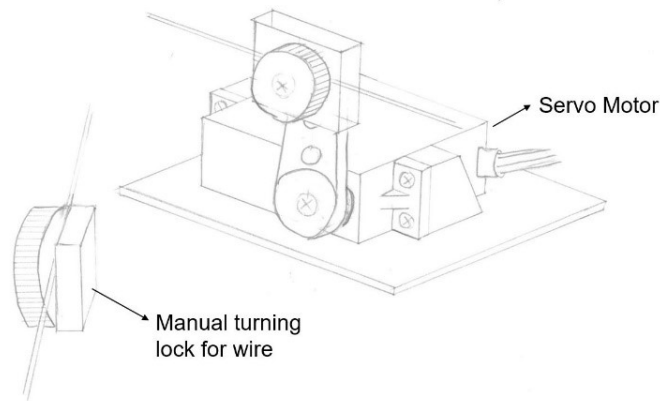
Secondary Unit to hold guidewire in position and under tension
